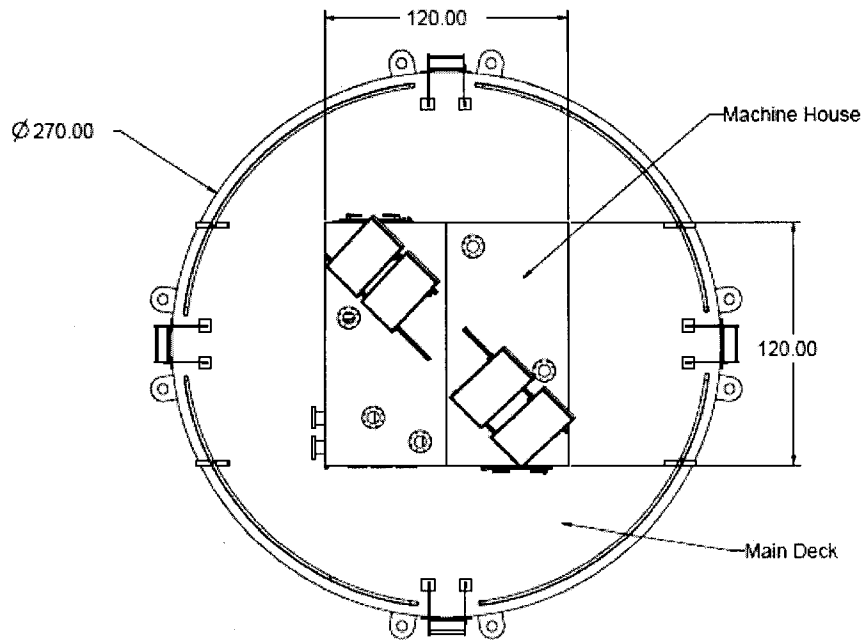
Top view of buoy showing major external dimensions (inches).
